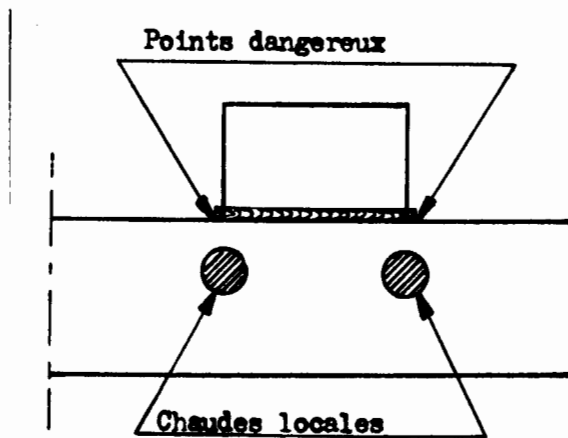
Example of local heating, raising compressive residual stresses at the weak points of a connection with lateral gusset plate (after Puchner). Elevation view.
